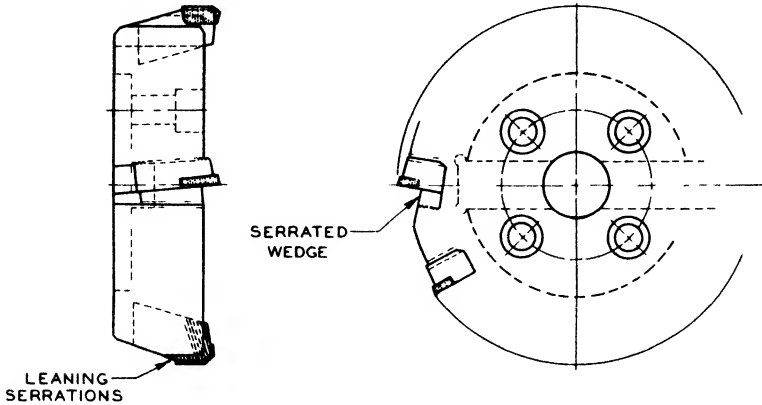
(A) The Goddard, Cone-Type, Carbide-Tipped Face Mill Which Uses the Blade Shown in (B) of Fig. 13
